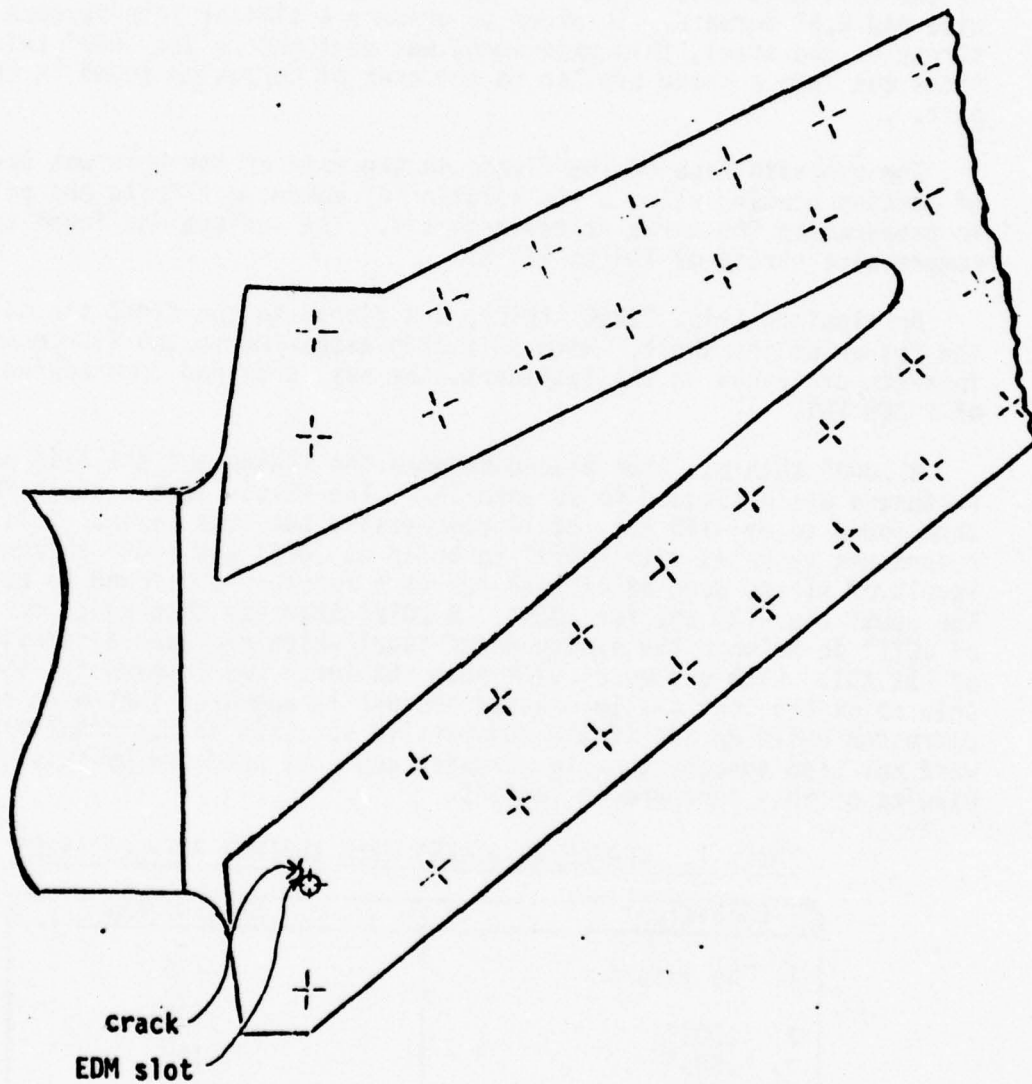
LOCATION OF HOLE IN LOWER FLANGE IN WHICH CRACK WAS INITIATED.
